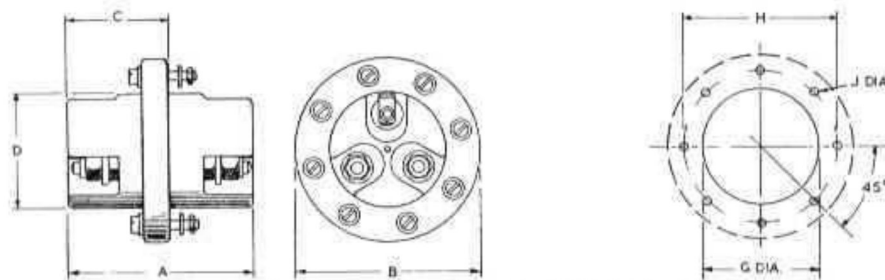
Panel piercing details, heavy duty bulkhead unit
